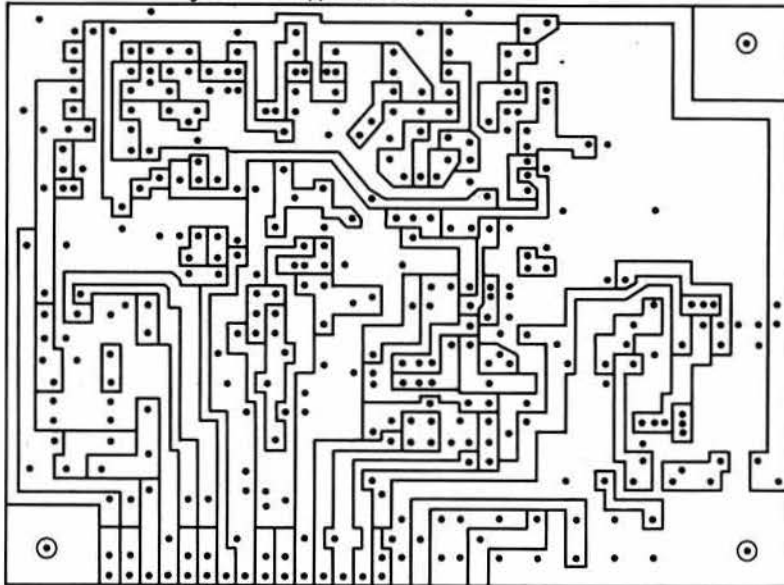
The modified G4CLF exciter pcb used by G3TSO
